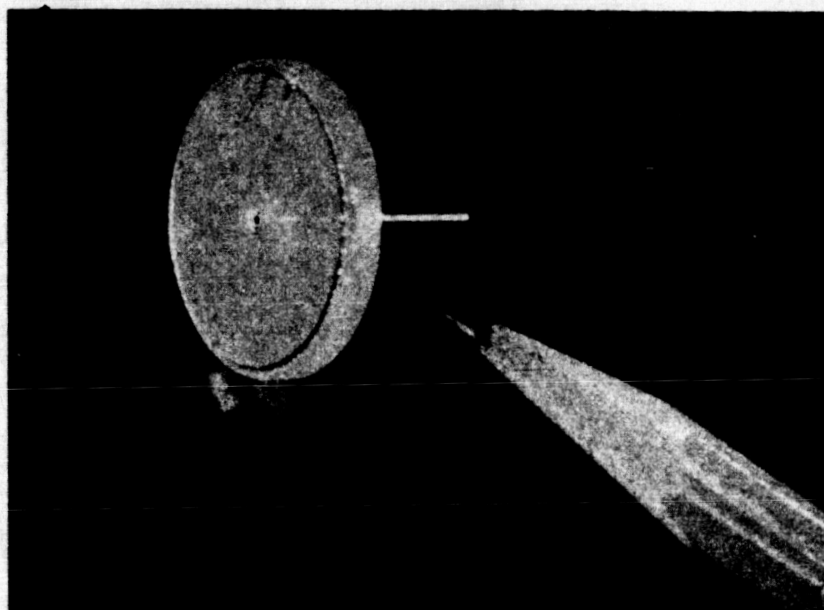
Chem-milled Aluminized Blank with Conductive Pressure-relief Tube. (Membrane Not in Place)
